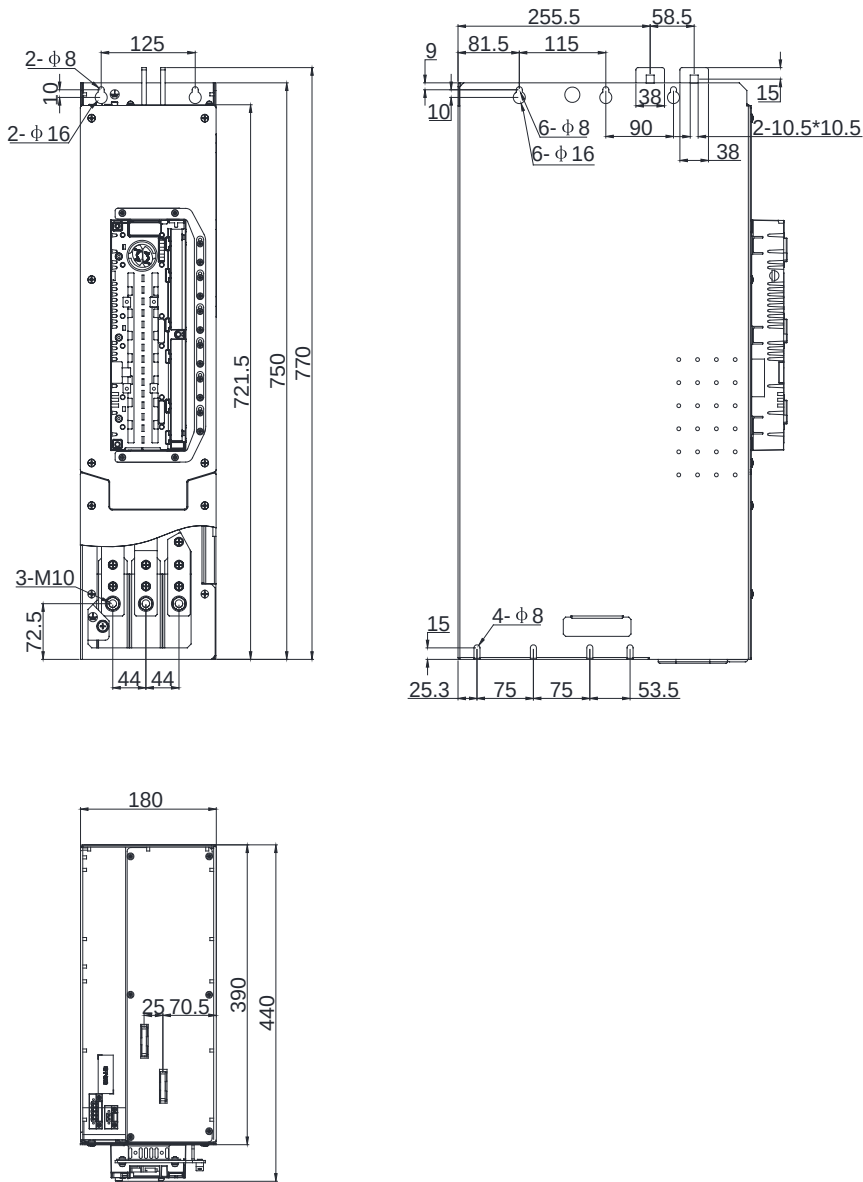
Dimensions of Size H6 Inverter (mm)
